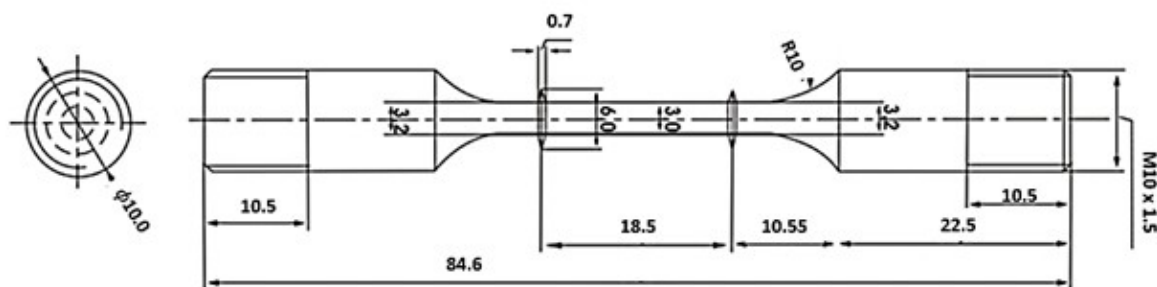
Configuration of the specimen with dimensions in mm²⁶.
